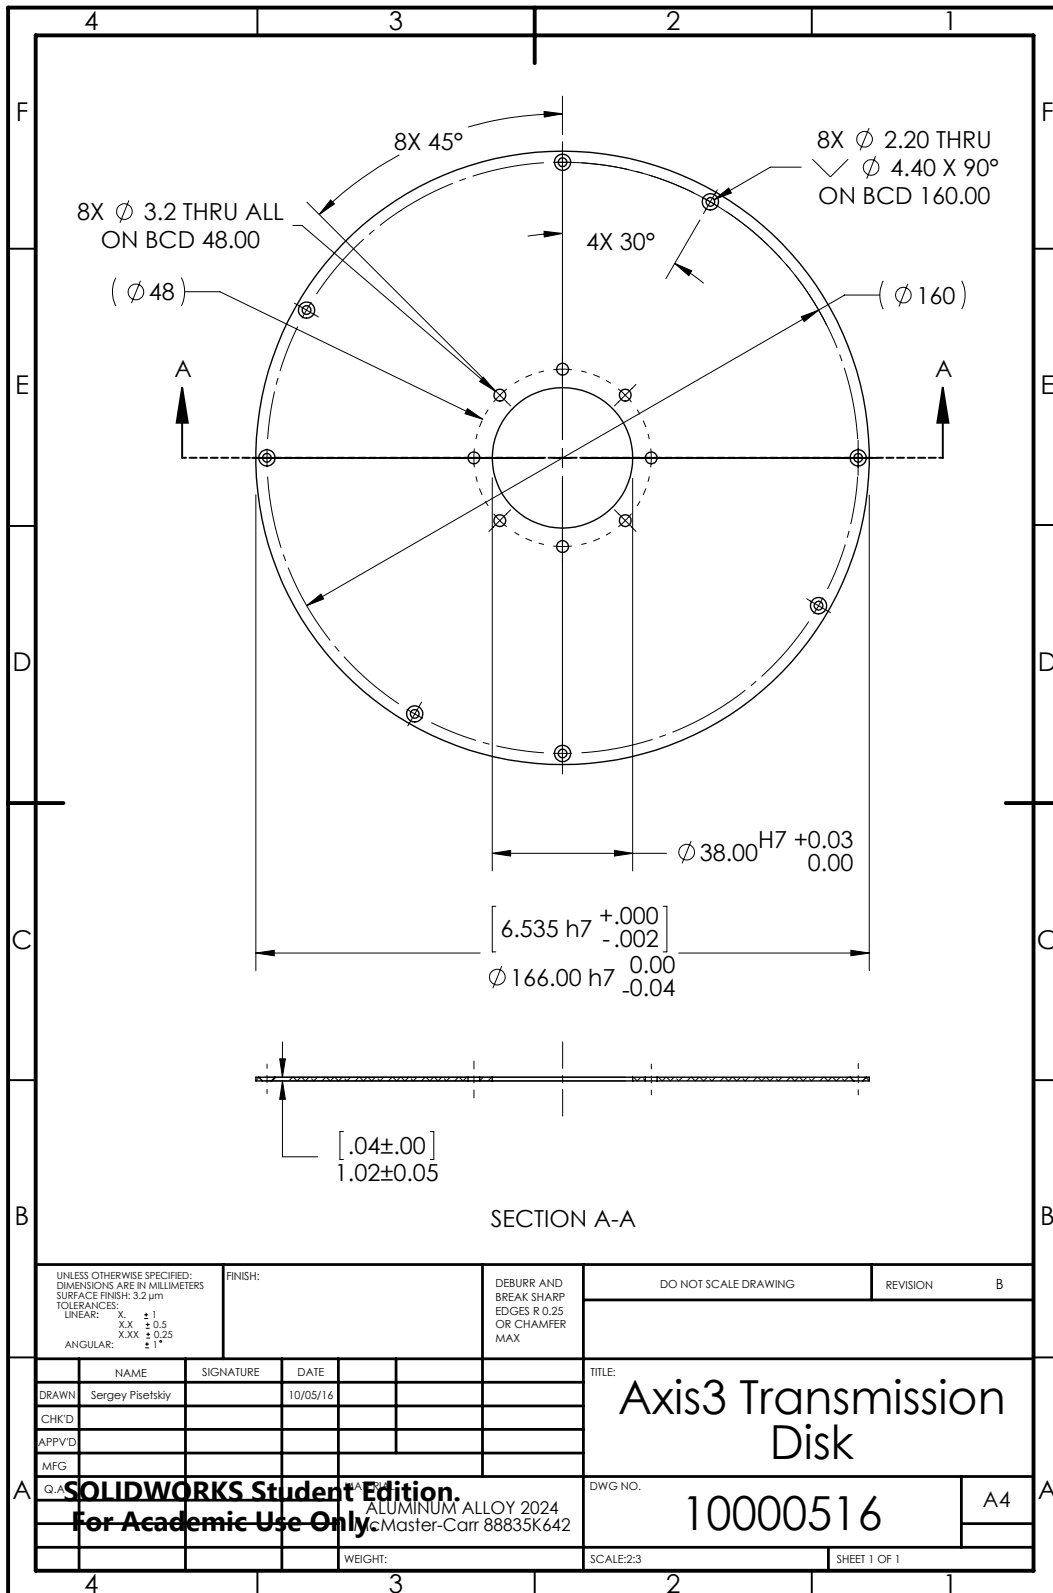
Drawing: Joint 3 clutch transmission disk.
